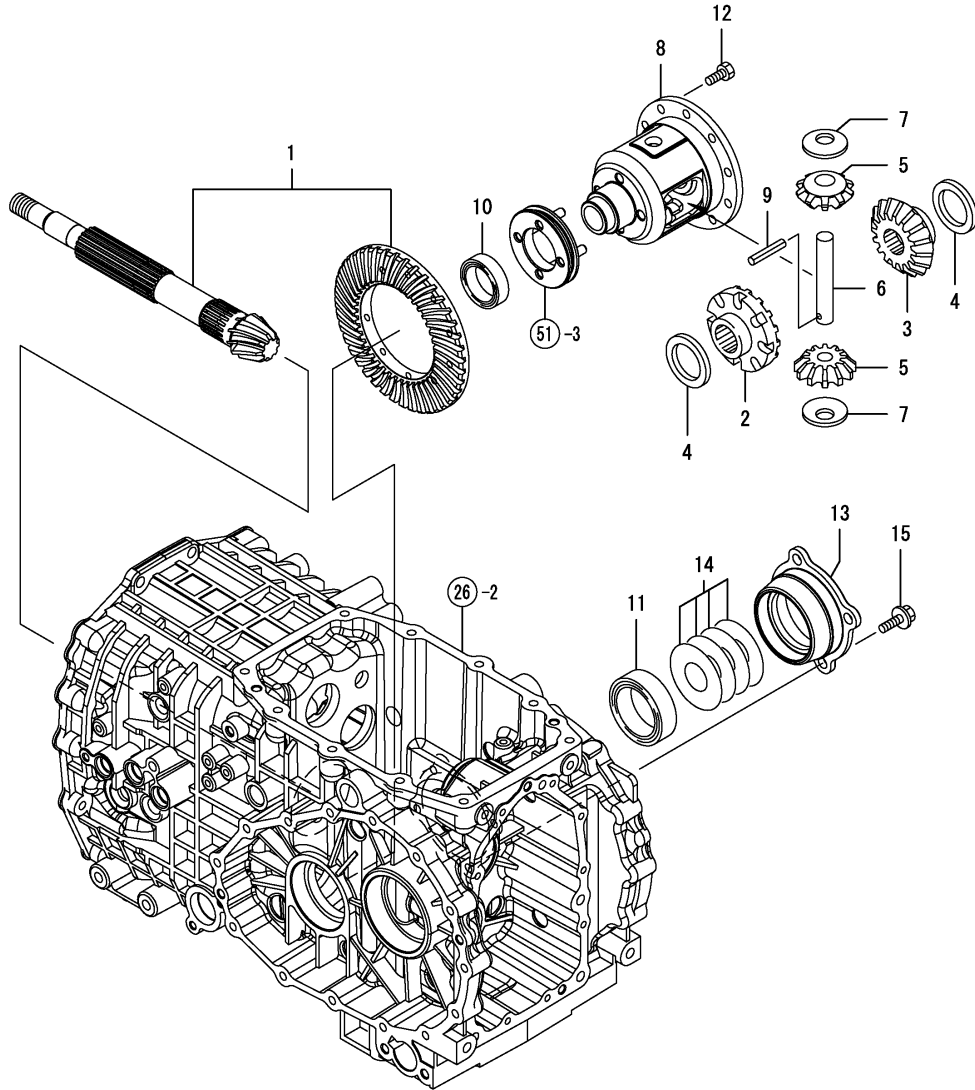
RING GEAR & DIFFERENTIAL GEAR
